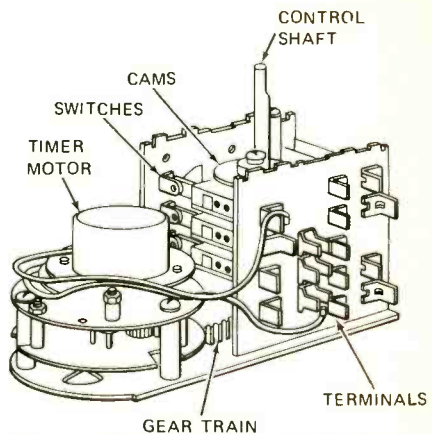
TYPICAL TIMER ASSEMBLY, with motor and contacts.
